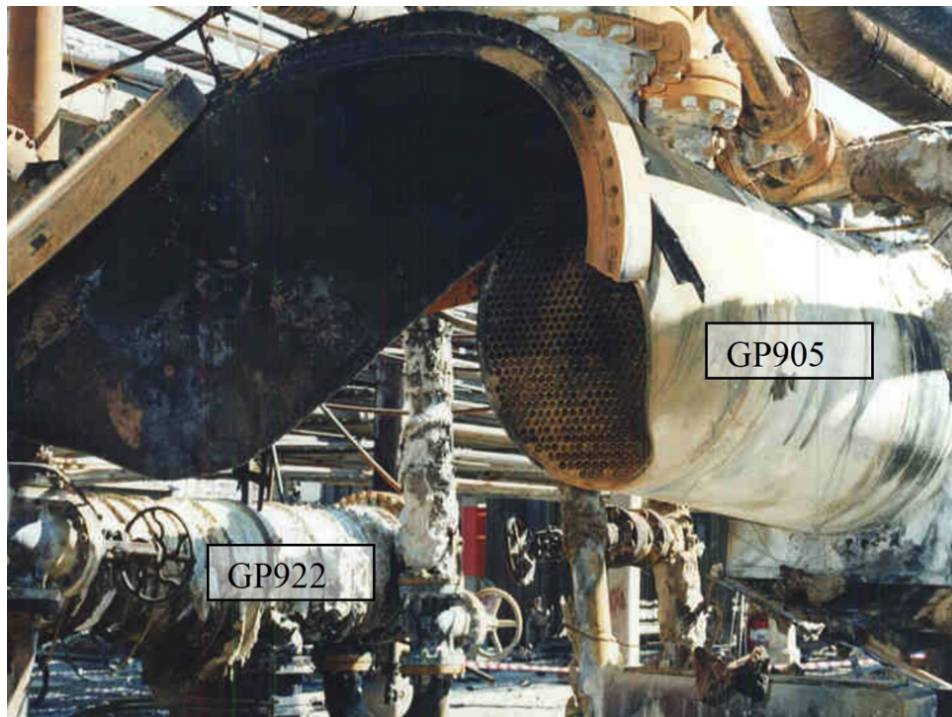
Cold brittle fracture at the heat exchanger after the Esso Longford gas explosion.
